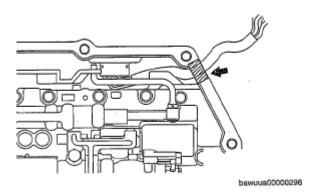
Identifying Lock Plate And TFT Sensor Courtesy of MAZDA MOTORS CORP.
